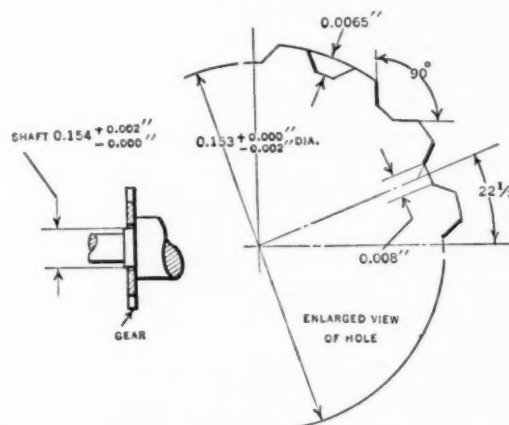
DIE-CUT GEAR ON SHAFT, AND ENLARGED VIEW OF SERRATIONS IN HOLE WHICH PROVIDE BETTER GRIP ON SHAFT
